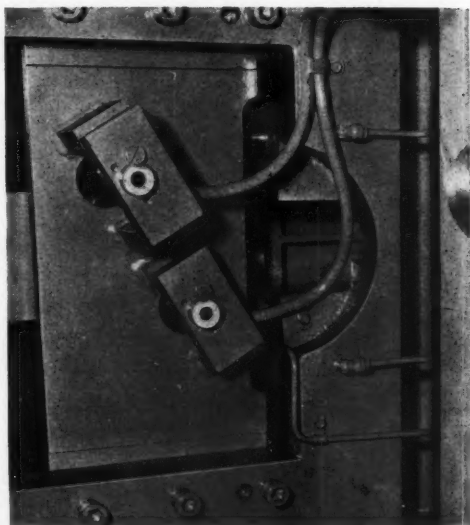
This close-up view shows the method employed for mounting two sensing heads in different planes on a drill bush plate
